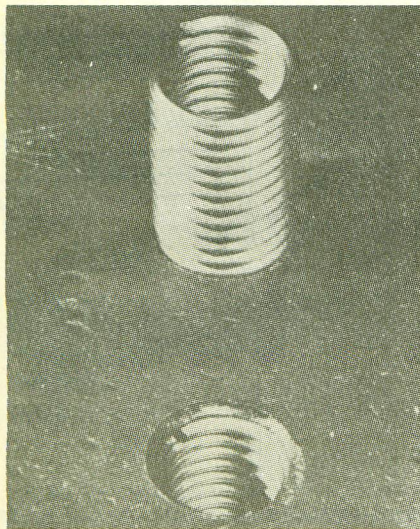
A thread insert and a completed repair are shown above. Special tools are provided in thread repair kit for installation of thread insert.
